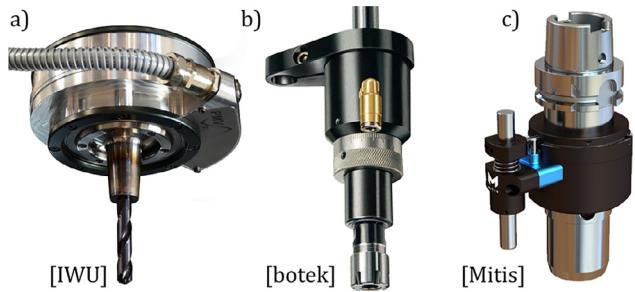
Industrial solutions for process assistance: a) PermaVib piezoelectric vibration tool holder, b) Botek mechanical axial pulsator, c) Mitis mechanical vibration tool holder.
